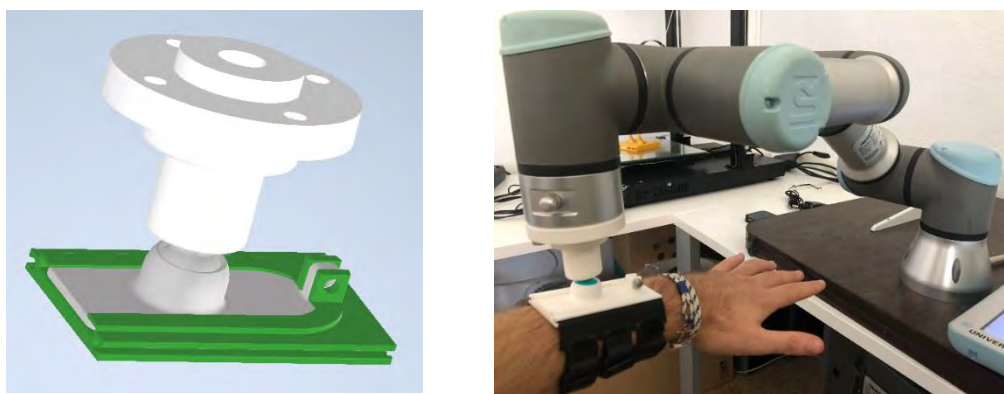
Final version of the end-effector and real prototype installed in the robot.
